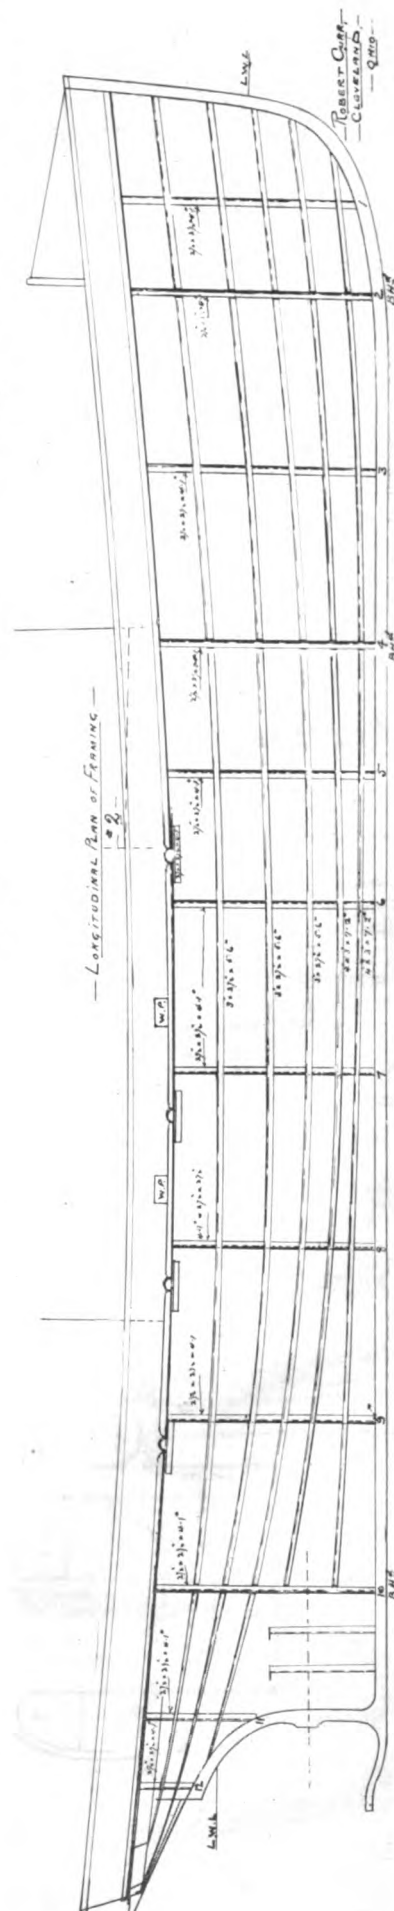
LONGITUDINAL PLAN OF FRAMING.
